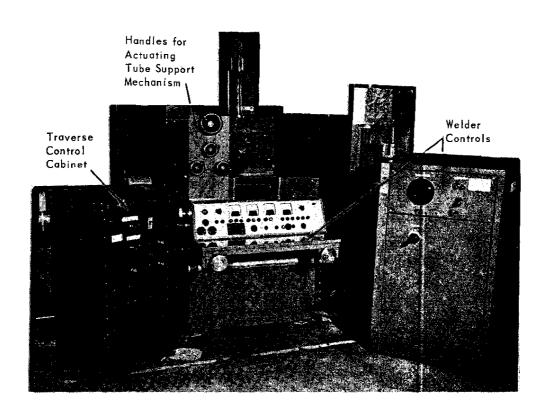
CONTROL STATION FOR ELECTRON BEAM WELDER
